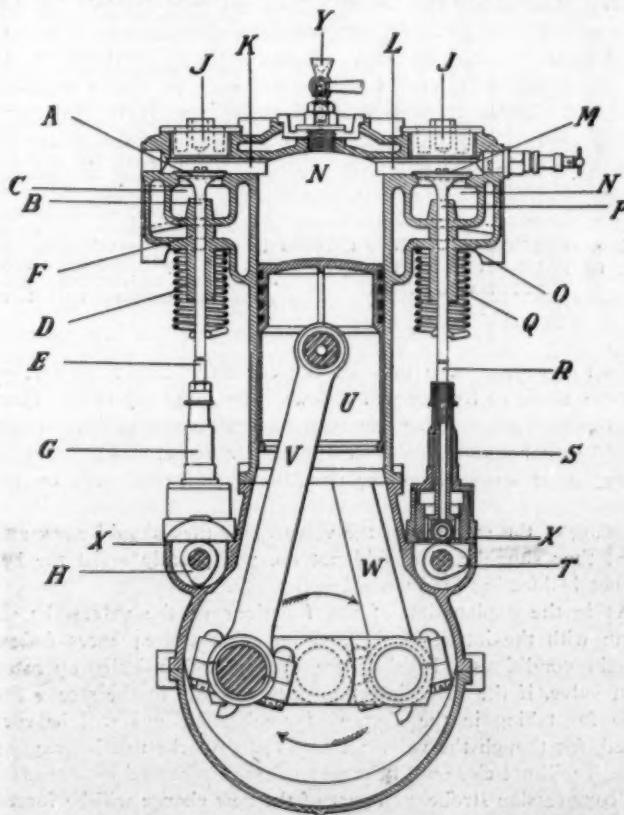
VERTICAL SECTION OF TYPICAL FOUR-CYCLE MOTOR WITH MECHANICALLY OPERATED VALVES.
